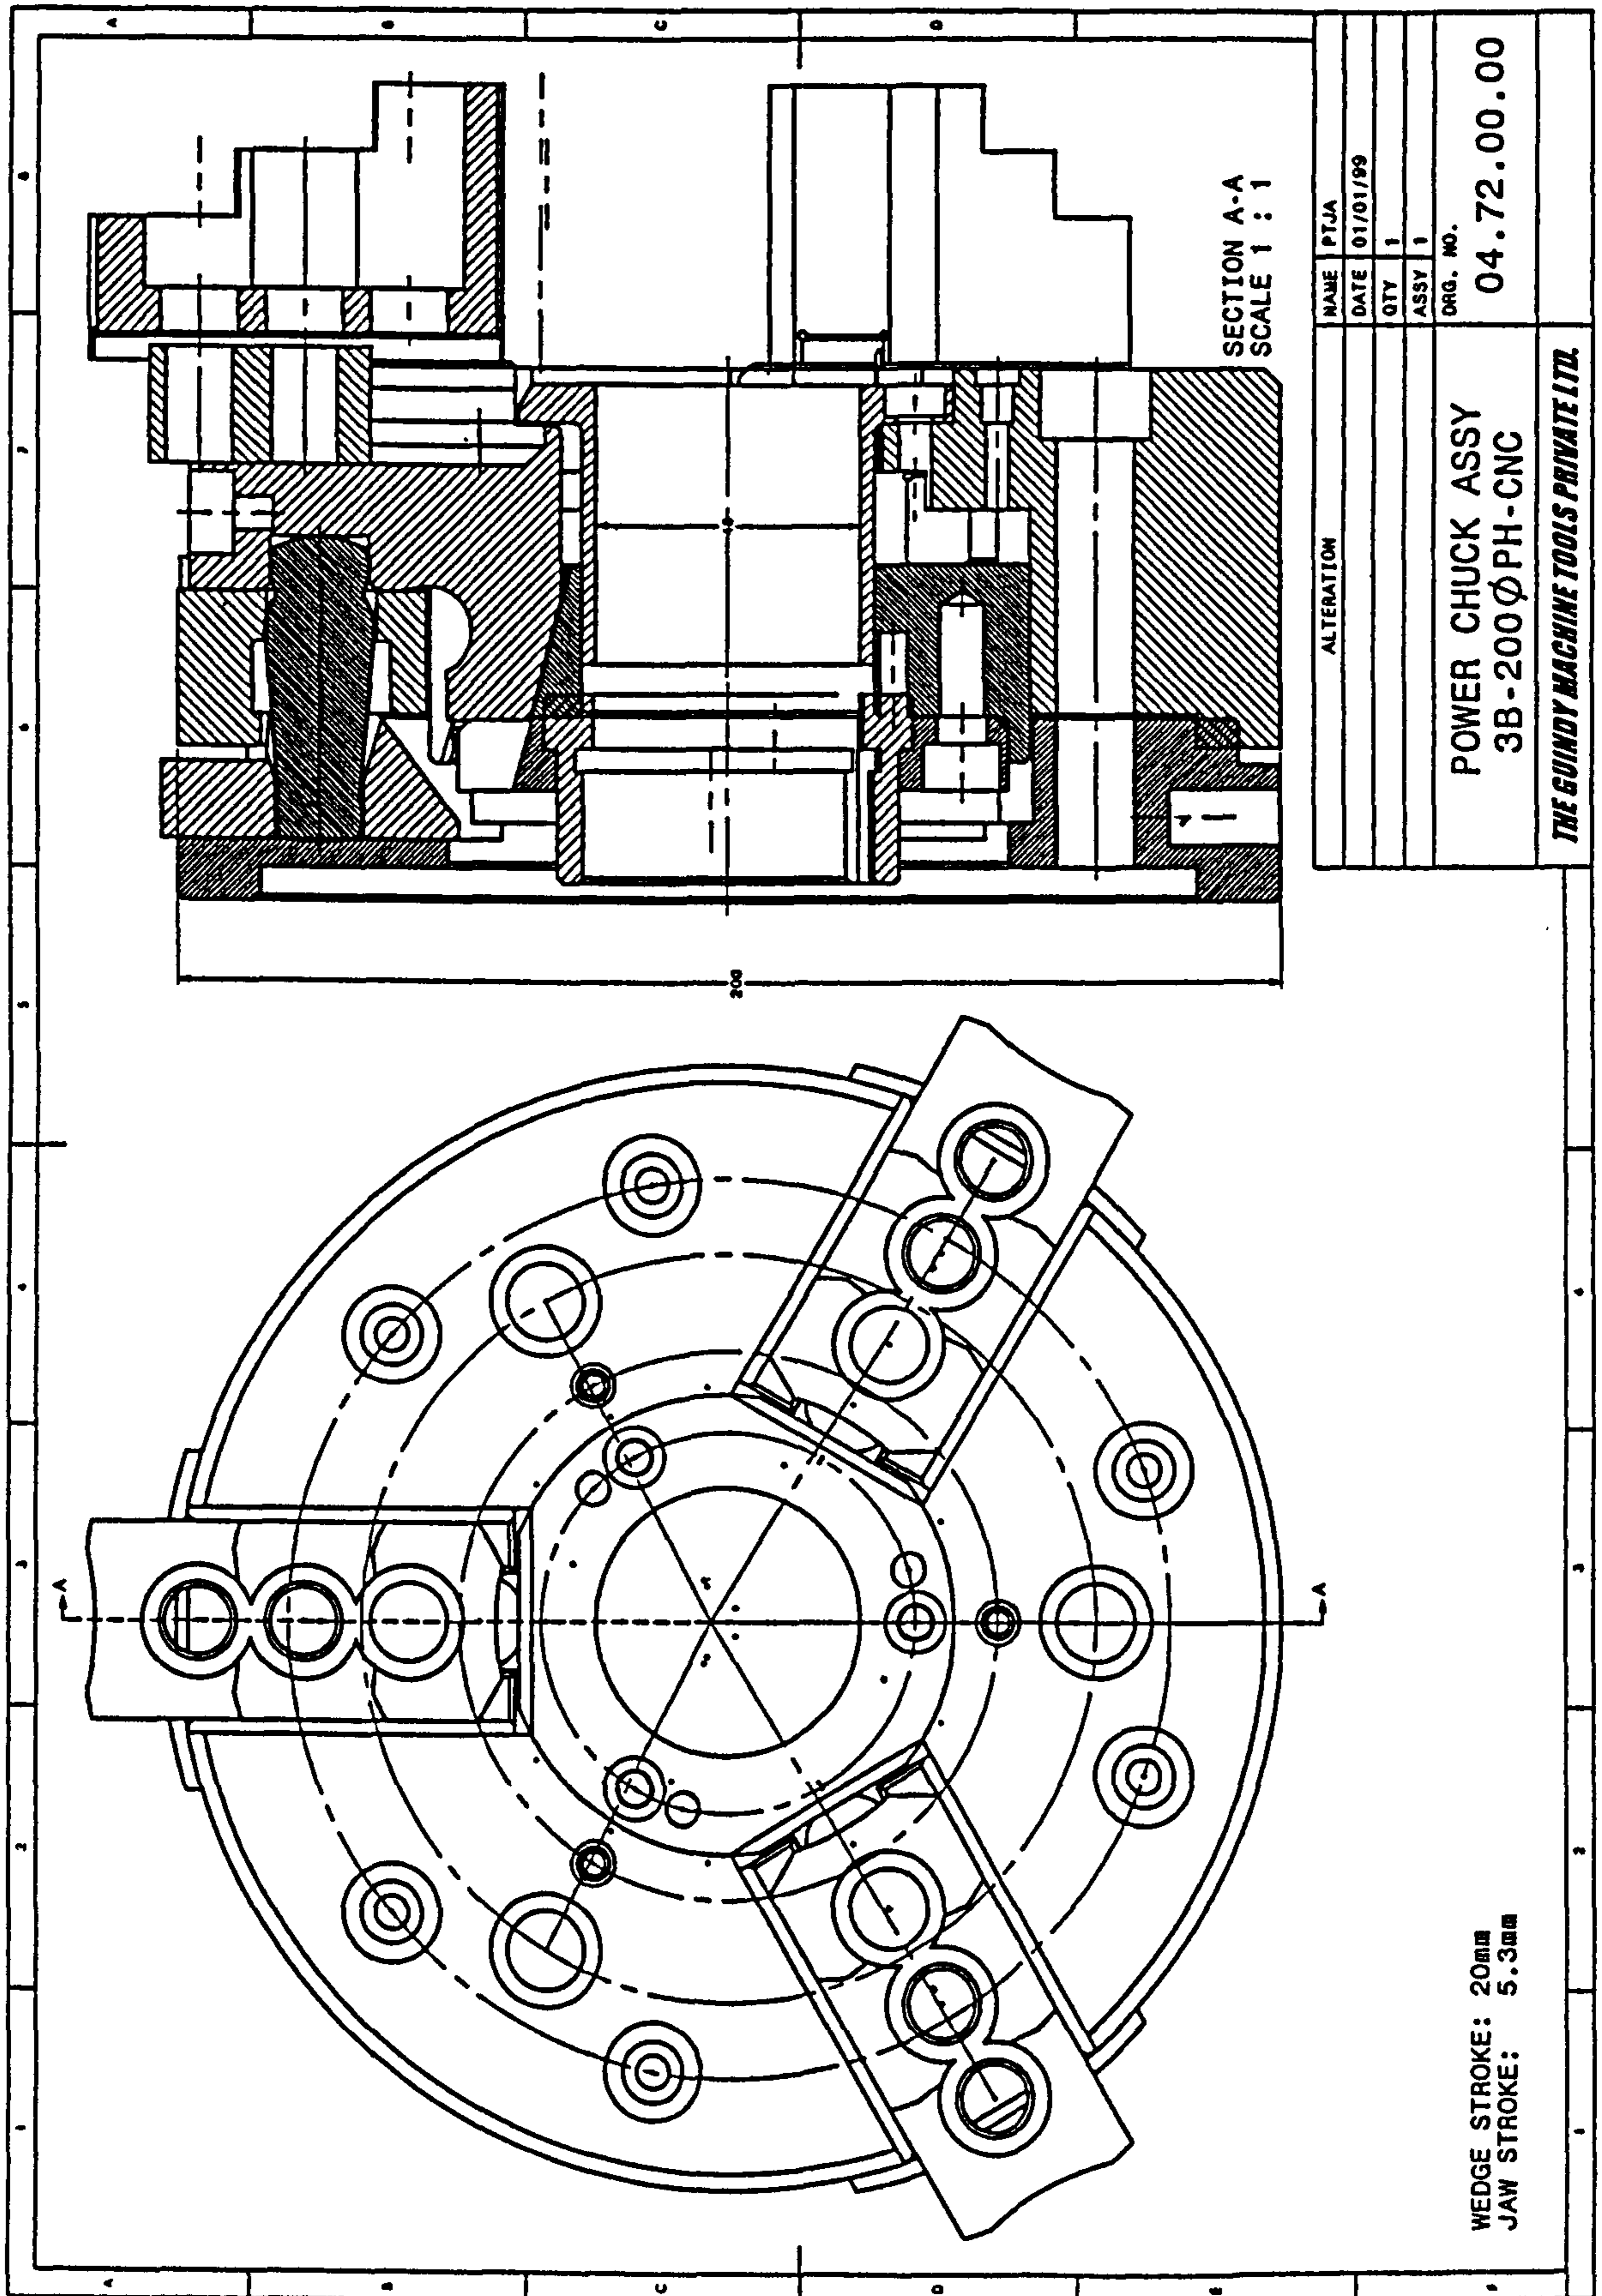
GMT Chuck Assembly – Pro/ENGINEER Drawing
